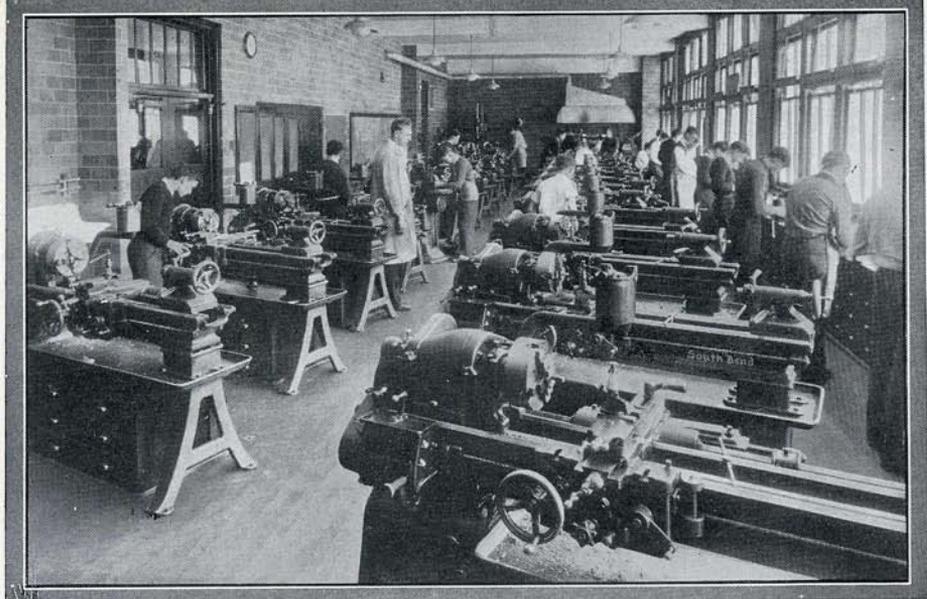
South Bend Lathes in Austin High School Shop, Chicago, Ill.
